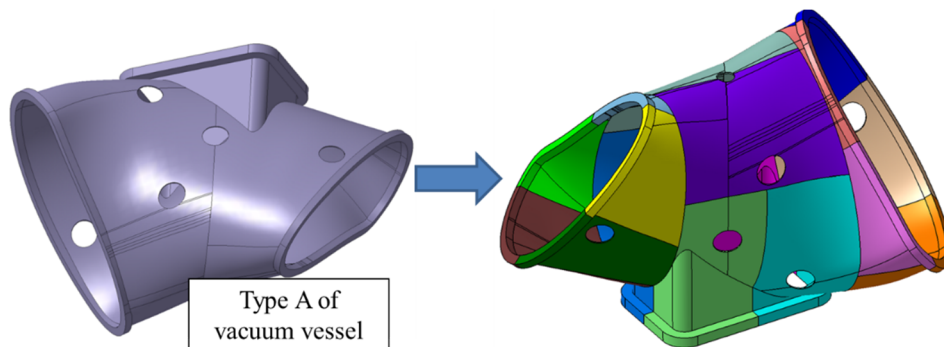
Type A of vacuum chamber is cut into 16 pieces to print by 3D printer.
